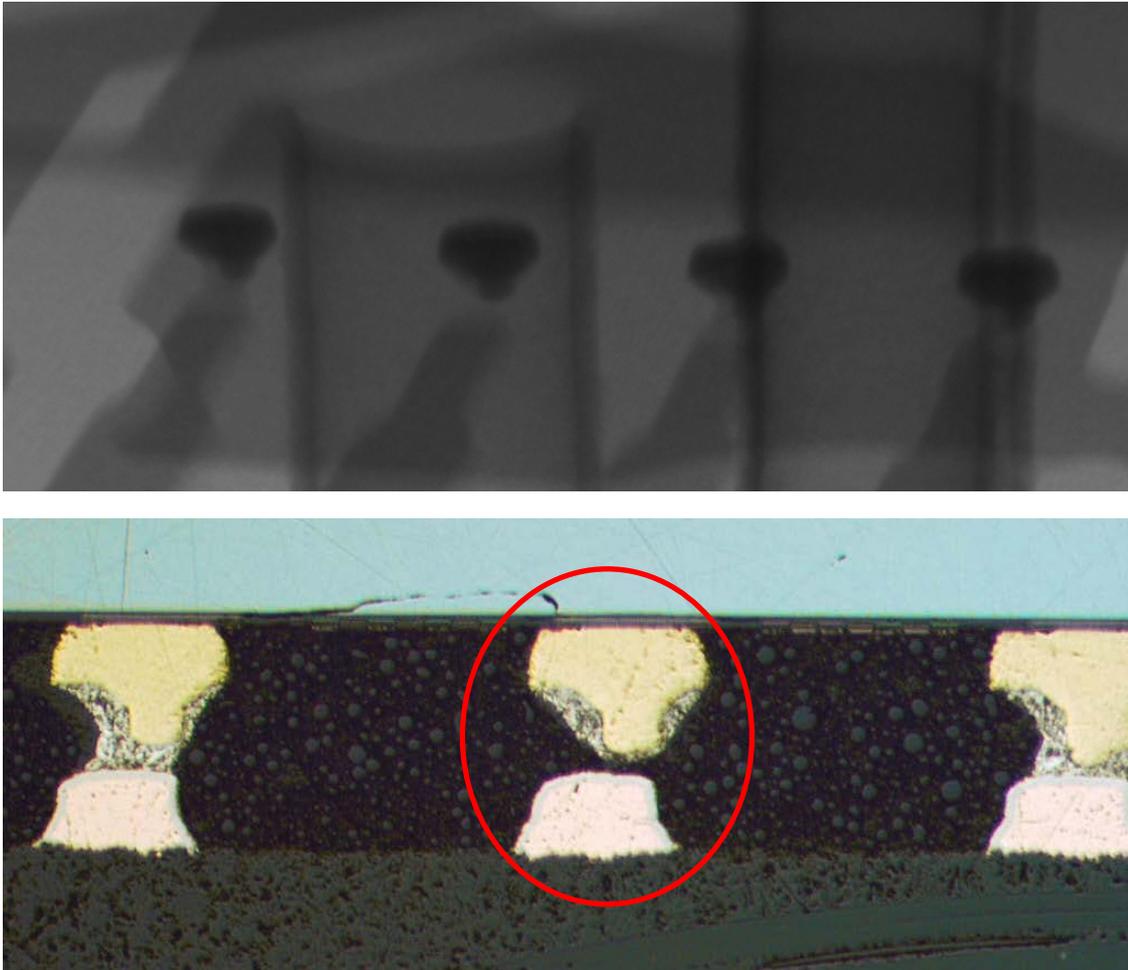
Views showing the open flip-chip interconnect as seen by X-ray inspection (top) and optical visual inspection of a cross-section.
